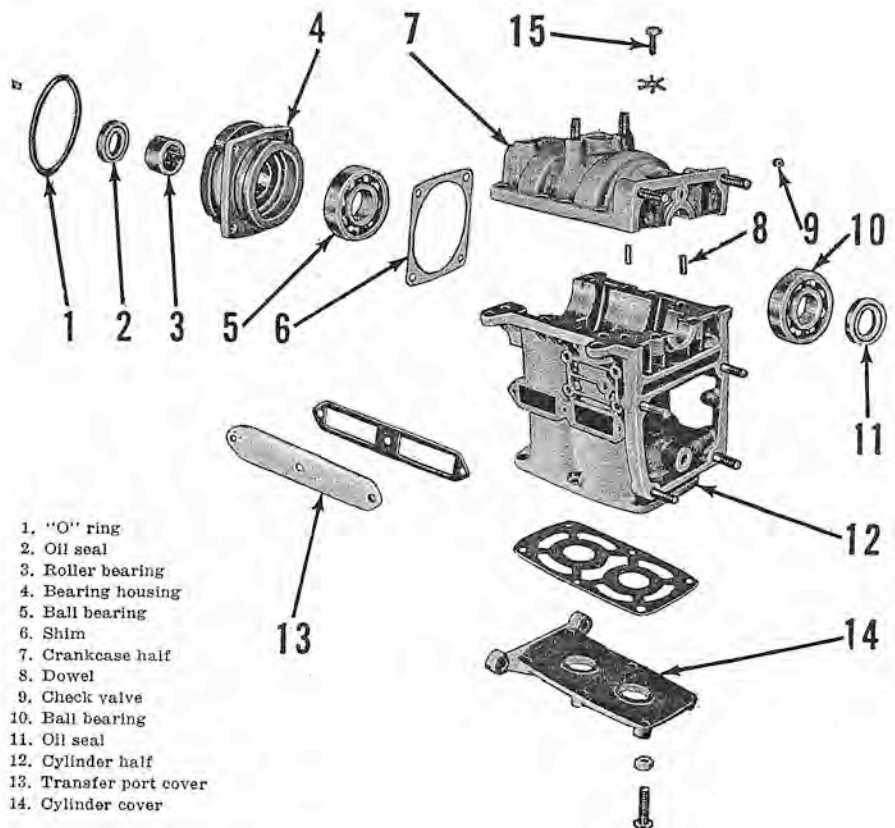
Exploded view of powerhead crankcase and associated parts.
